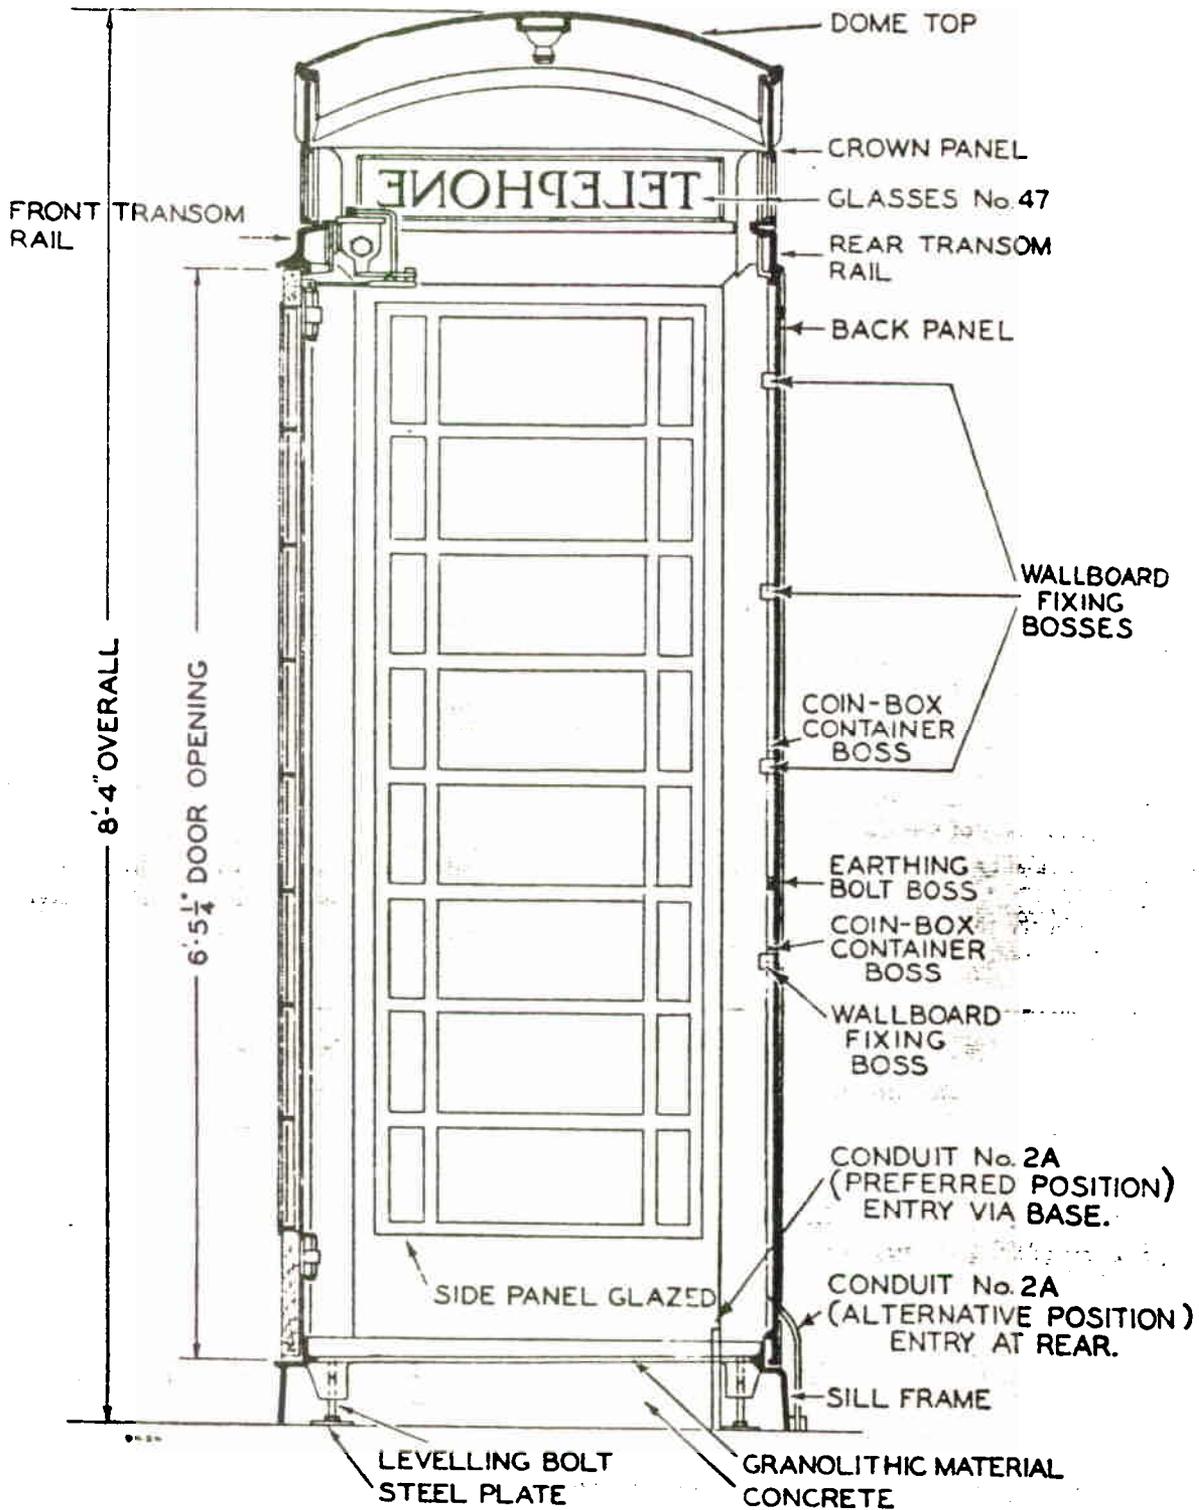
KIOSK No. 6—SHOWING COMPONENT PARTS
